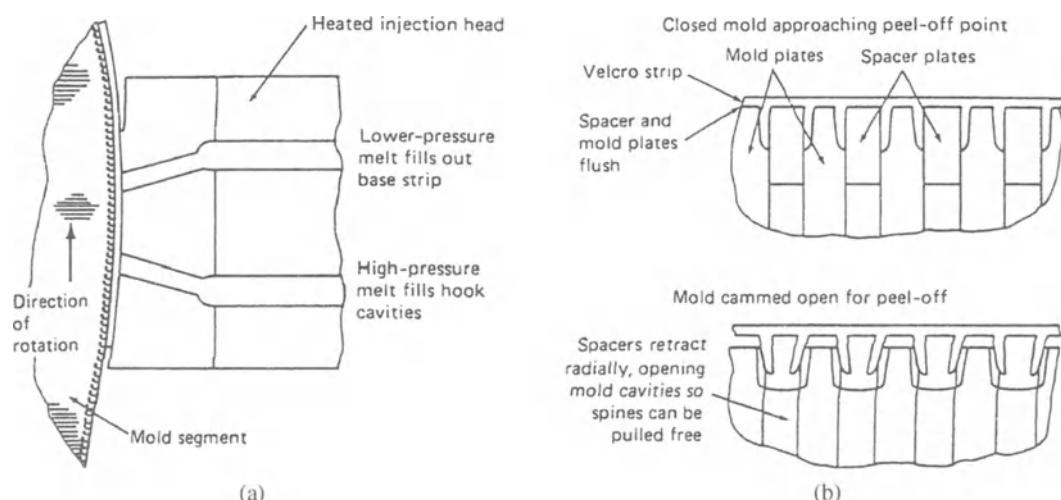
Molding Velcro. (a) Two orifices feed melt onto a rotating mold. (b) Method used to peel Velcro strip from the mold.
